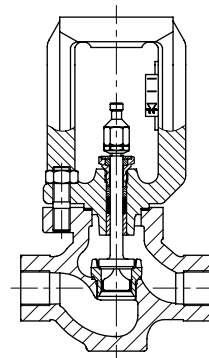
· Type 3241 Valve, 1/2" to 2" with NPT thread
